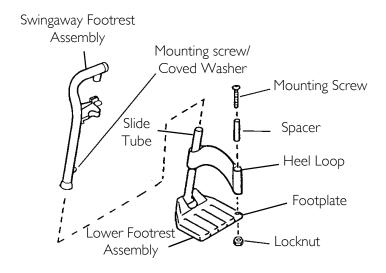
Replacing Heel Loop - Composite Footplates
